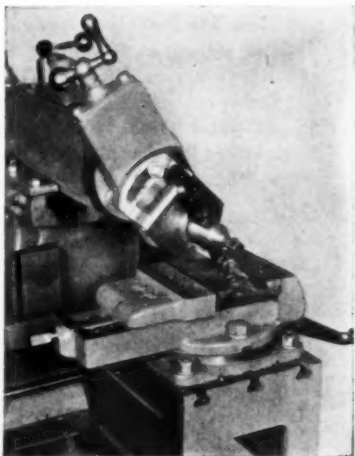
The ready adaptability of a 7" shaper in cutting small dovetails or other forms is shown here.
